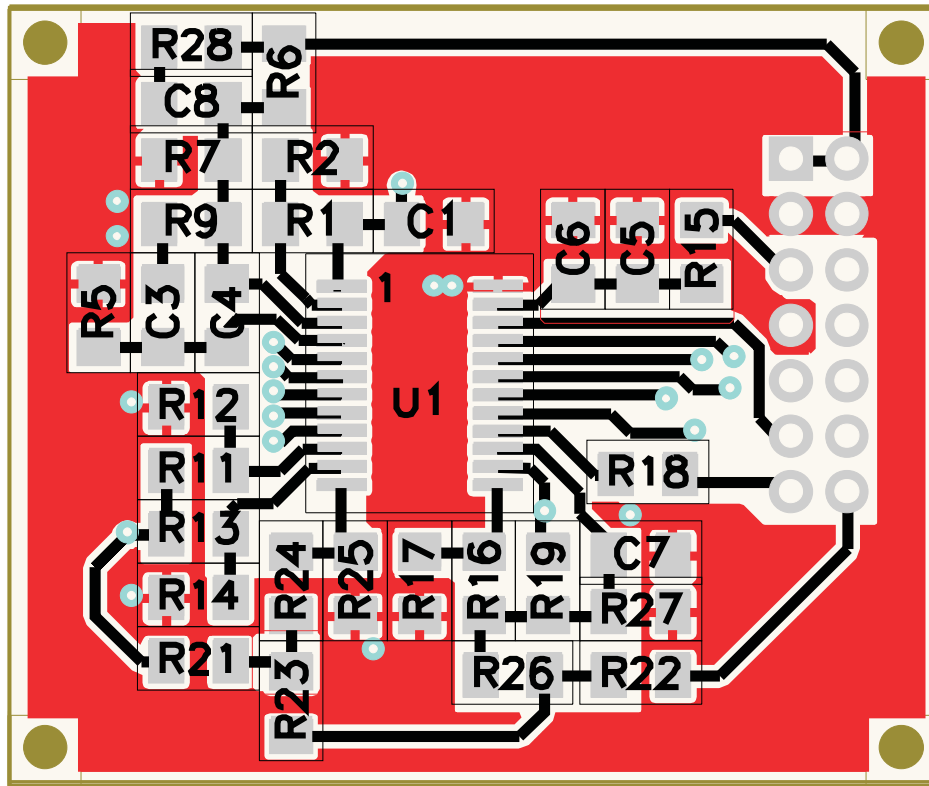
UCC28950EVM-442 Daughter Controller Card Top Layer Assembly Drawing (top view)
